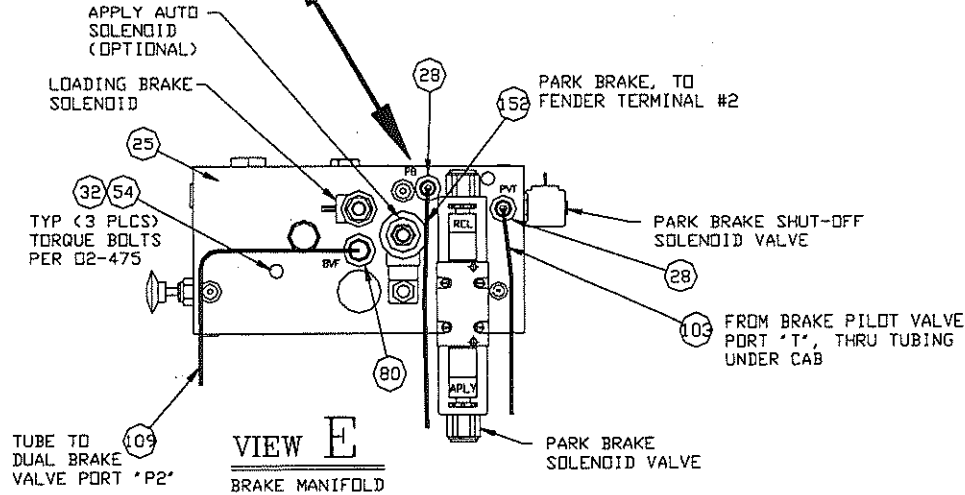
BRAKE SYSTEM ASSEMBLY (A85184, SHEET 3 OF 11)
